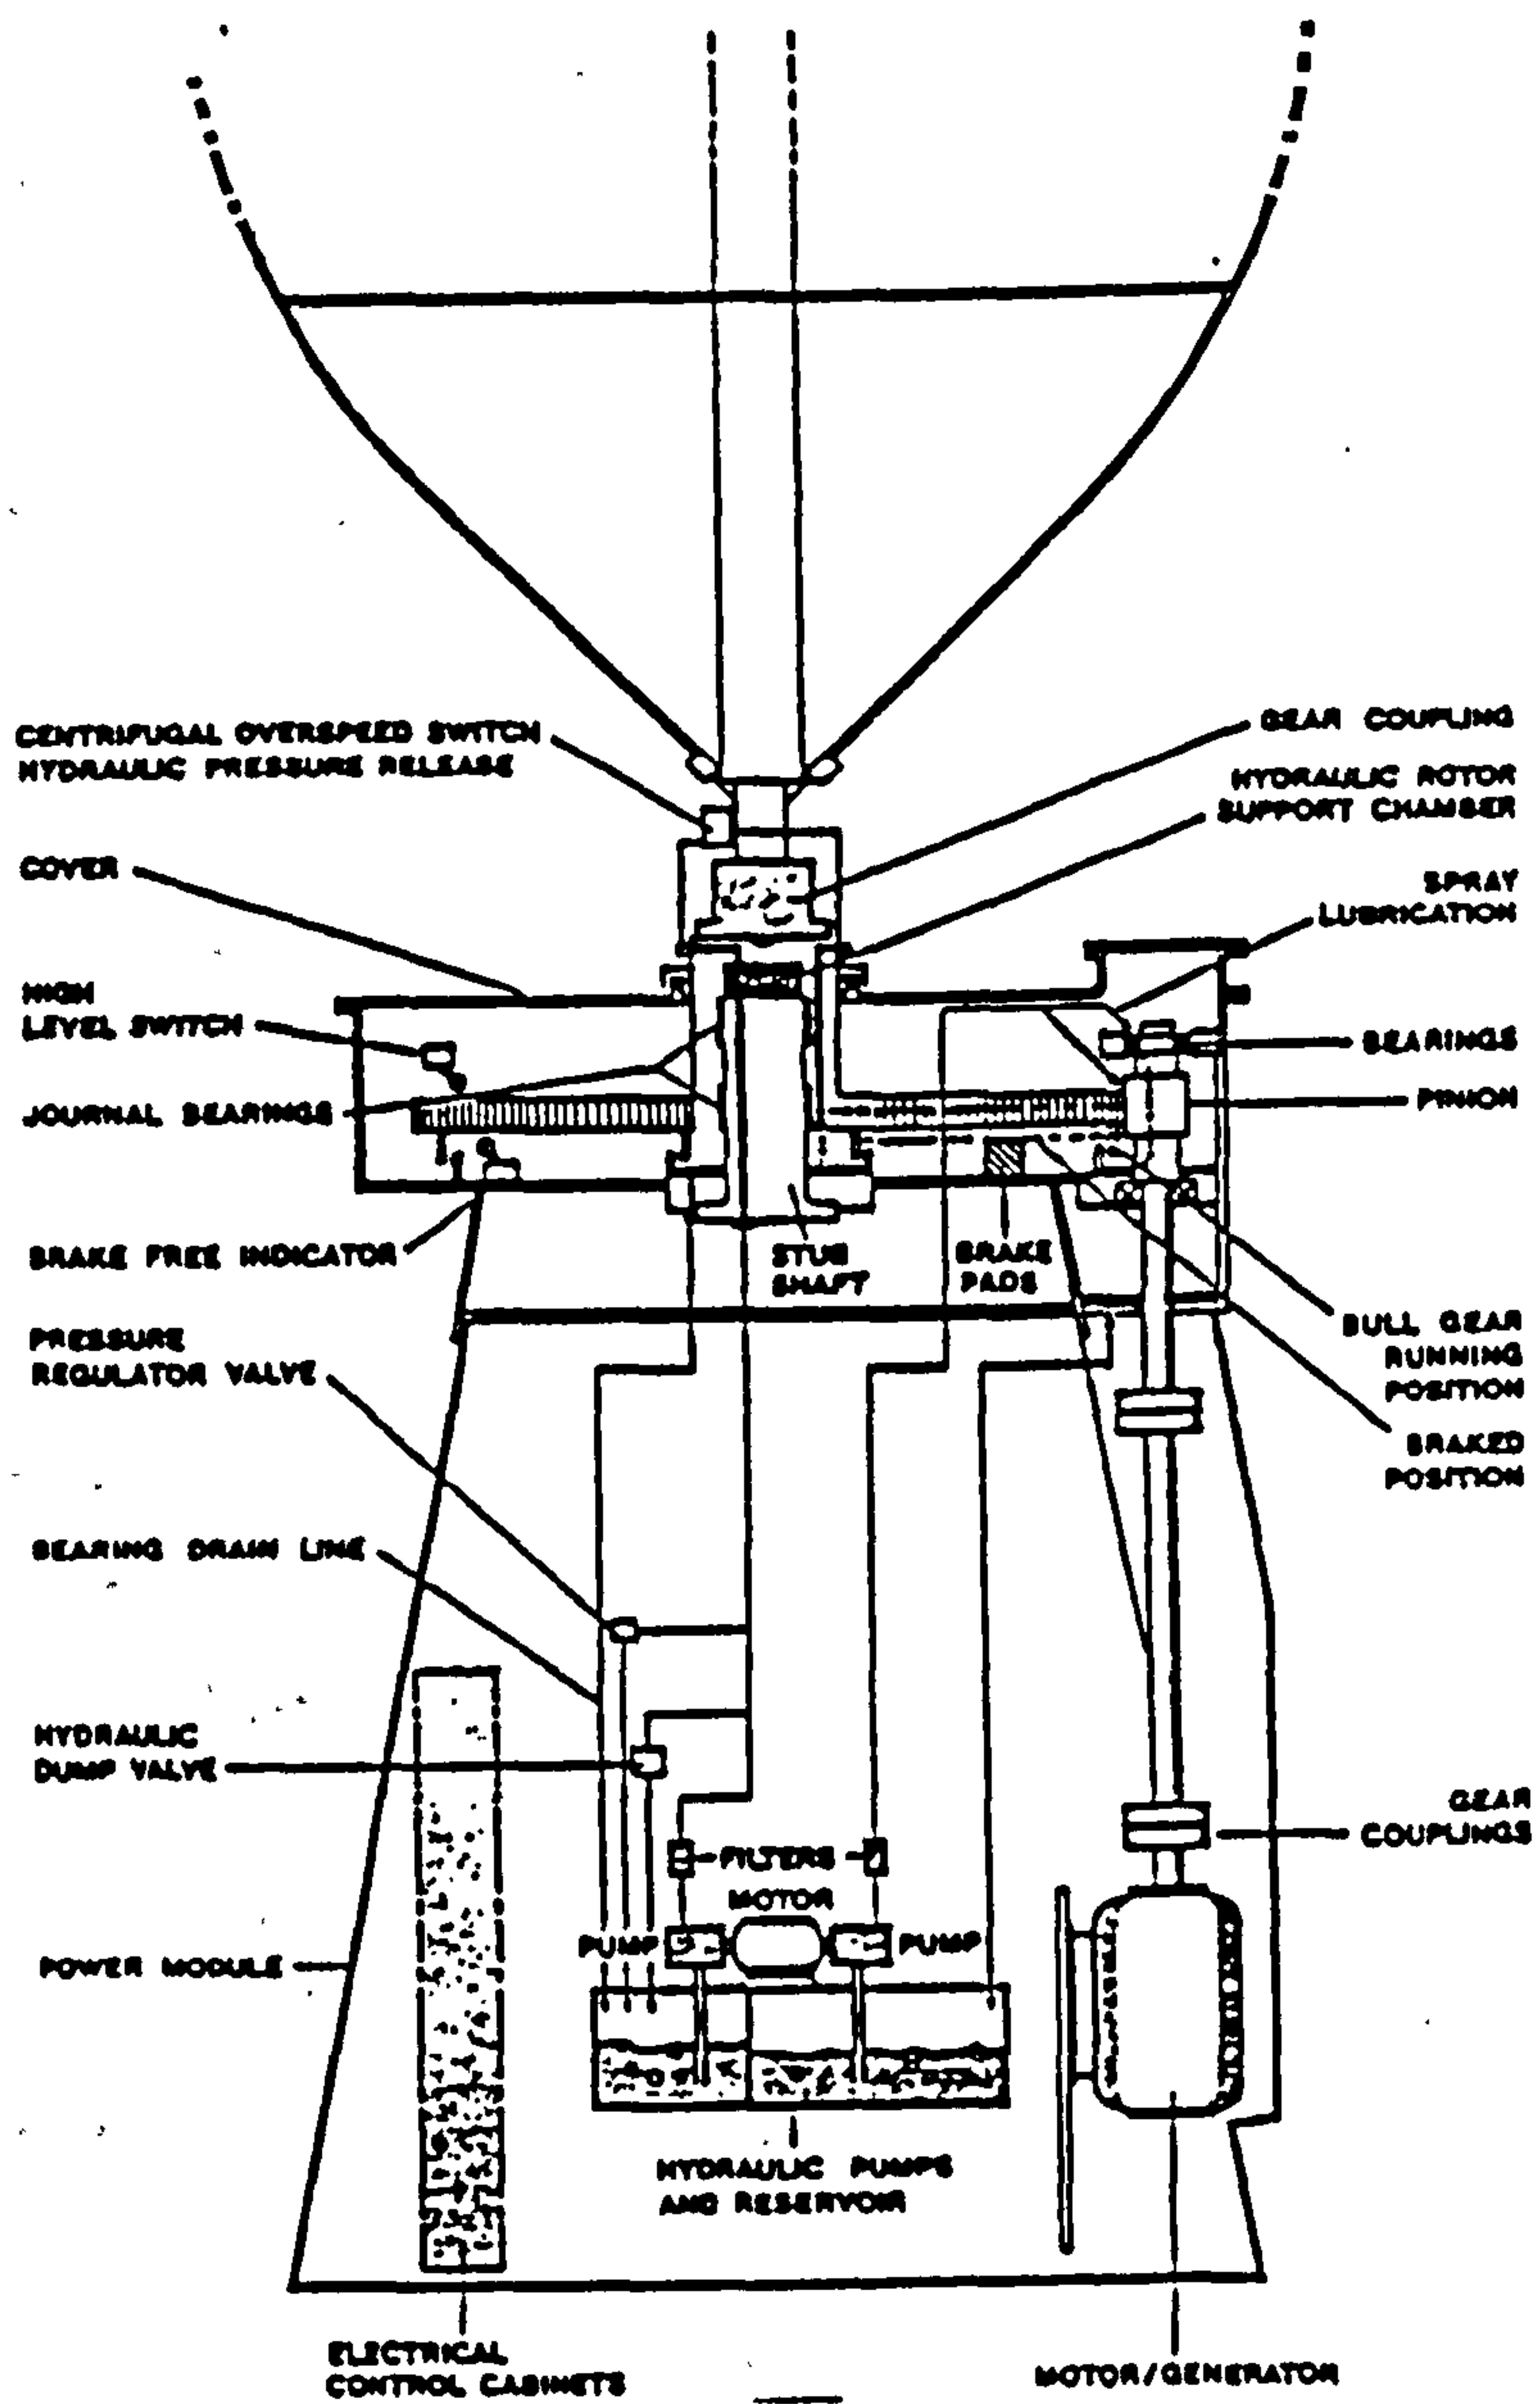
DAF-Indal 50 kW VAWT hydraulically released stationary pad rotor brake
